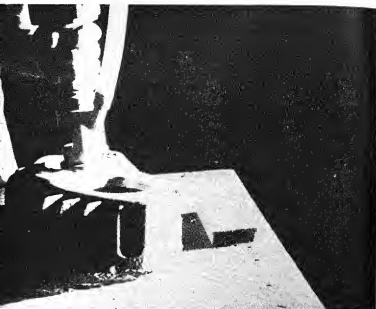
Cone grinder working with local exhaust ventilating system fitted and operating.
